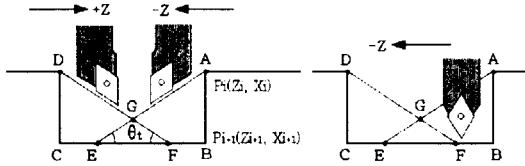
Tool selection rules (Tool 1, 2, 3)
